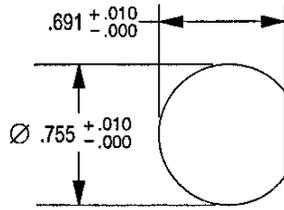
MOUNTING HOLE DIMENSIONS, SHELL SIZE 13
